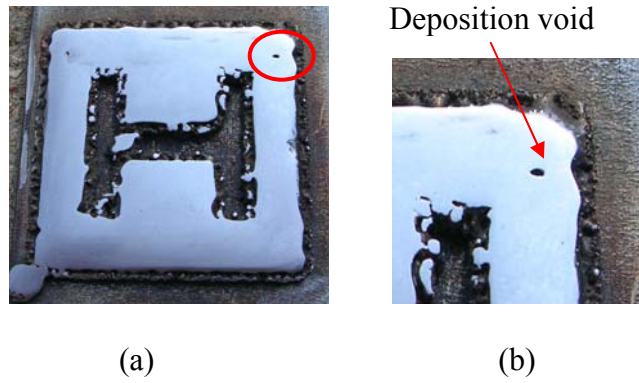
Deposition void example a) deposit after machining out the top surface b) close up view.
